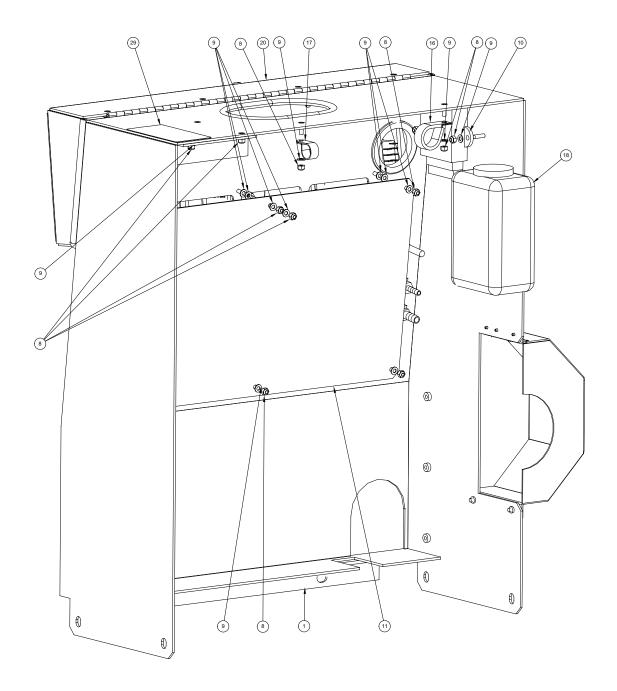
Dash Assembly - Rear View D-5257 Rev E
